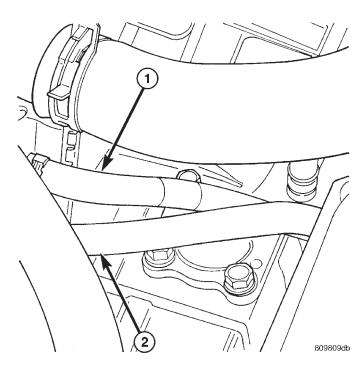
POWER STEERING GEAR OUTLET AND RETURN HOSES
